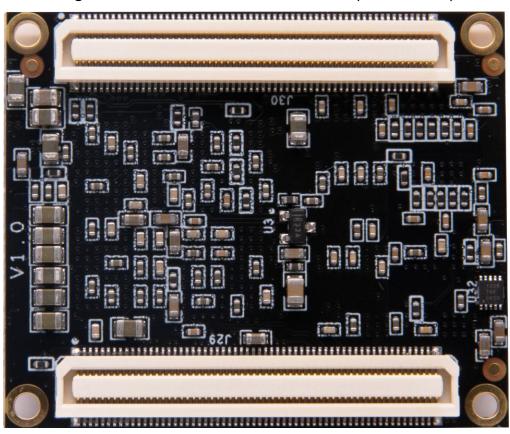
AC7Z100 Core Board (Rear View)
